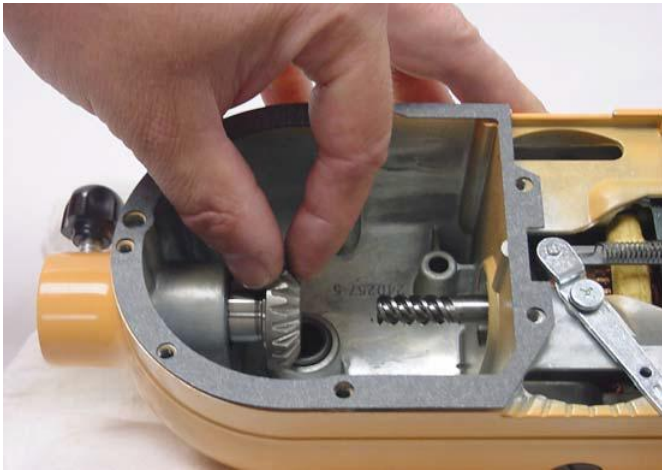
While lifting up on the center shaft, use a screw driver to gently pry the bottom cover from the housing. Remove the attachment hub bevel gear from the gear case/motor housing.
